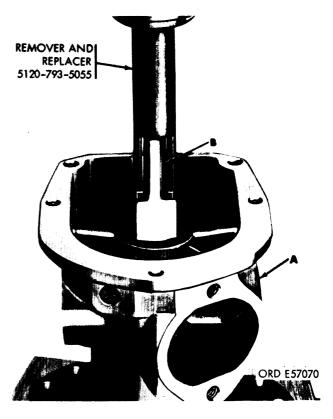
Pressing camshaft and associated parts from pump housing using remover and replacer 5120-793-5055.
